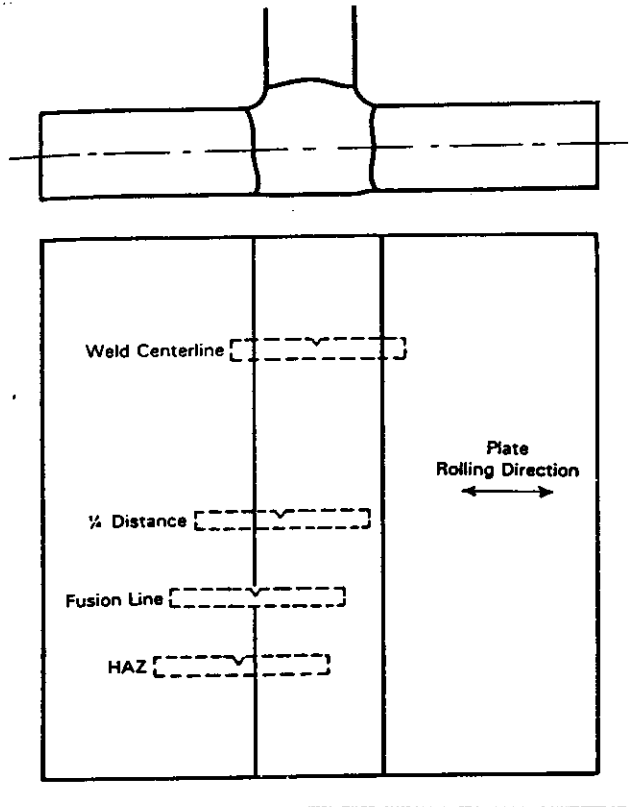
Locations of Charpy V-notch toughness specimens of the weld metal and HAZ extracted from the mid-thickness of electroslag welded T-joints.
